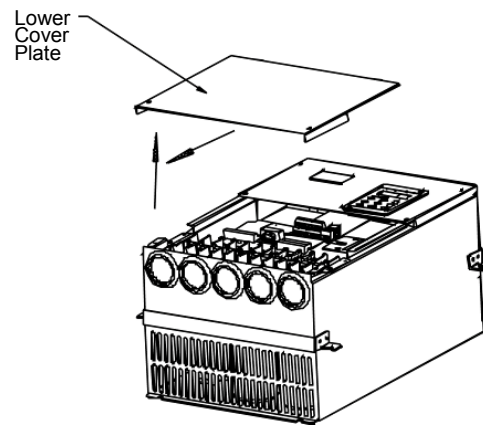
Removing the Lower Cover Plate of Sheet-Metal Enclosure
